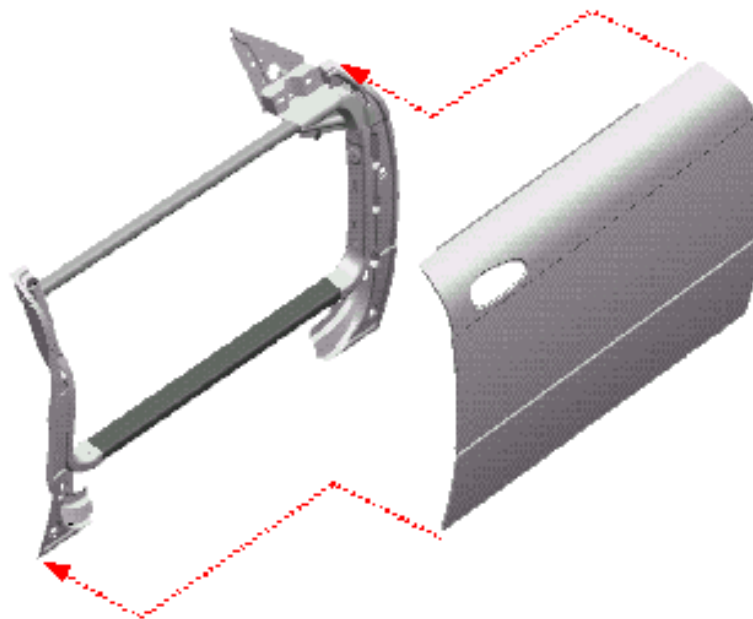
Subassembly #3 (CATIA): Front Door Outer
